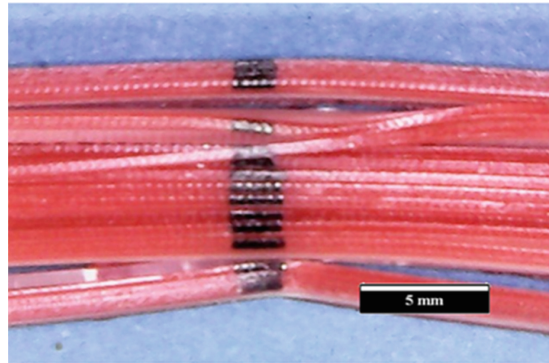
Fracture in the test specimen with infill pattern type rectilinear
